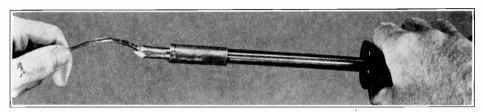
Correct way to hold the soldering iron while applying solder to one flat surface of the tip for tinning purposes. By keeping the flat surface approximately level, the tendency of the molten solder to roll off the tip is minimized.
